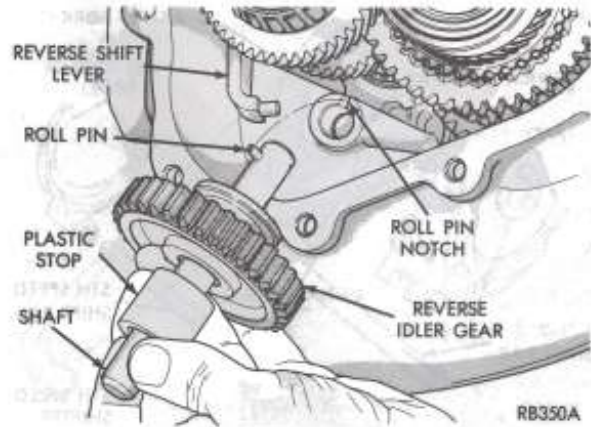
Reverse Idler Gear, Shaft, and Plastic Stop
